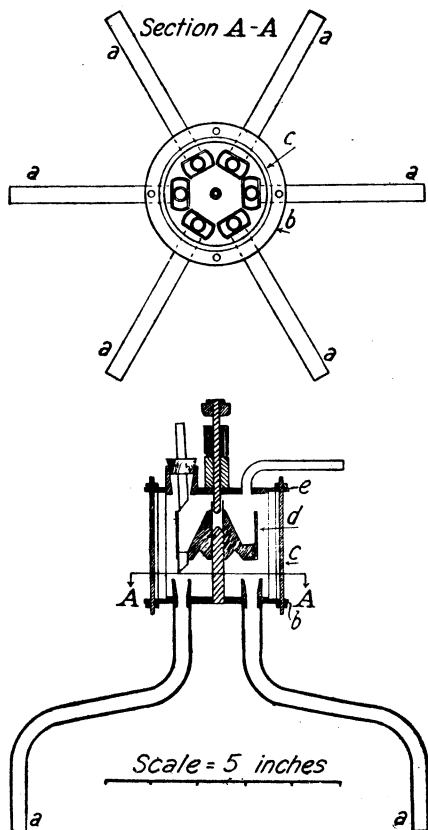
Plan and section of manually turned distributor for vacuum distillation fractions. *a*, Tubes connecting with receiving bottles; *b*, metal bottom plate of device; *c*, glass tube; *d*, rotating metal cup mounted on spindle set in bottom plate *b* and actuated by rod passing through a stuffing box on top plate *e*; *e*, metal top plate with stuffing box, rod, and knurled head mounted in center, and openings for condenser tube and vacuum line connection off center.
